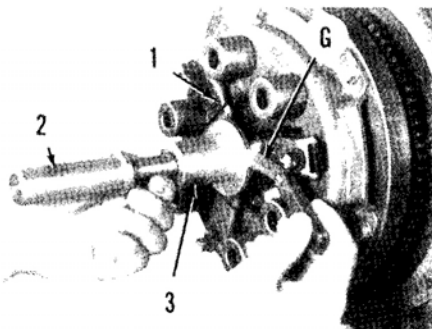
To check release lever (1) height, install clutch centering tool (2) with measuring tool (3), then measure clearance between release lever (1) and measuring tool (3) with feeler gage (G). Refer to text.
